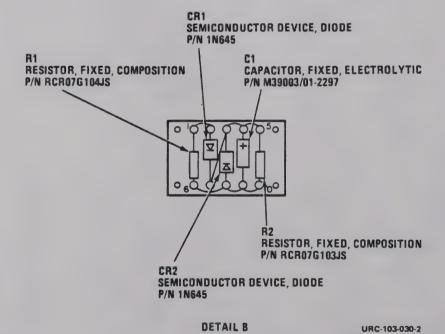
Exploded View, Cable Adapter (Sheet 2 of 2)
